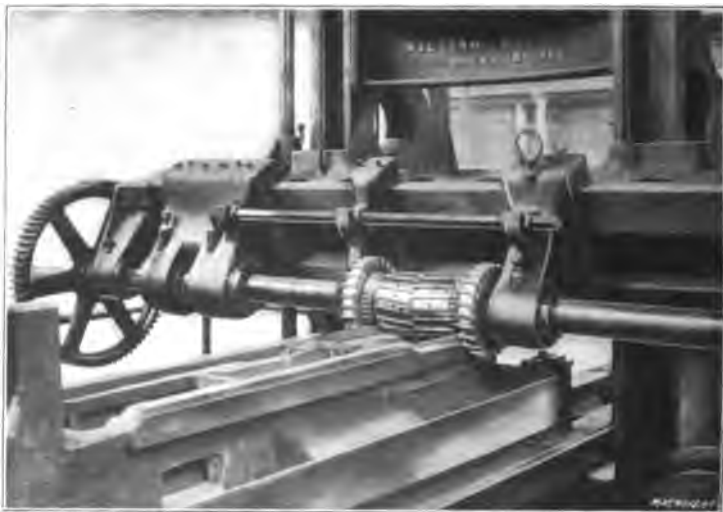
Ingersoll Horizontal or Planer-type Milling Machine
